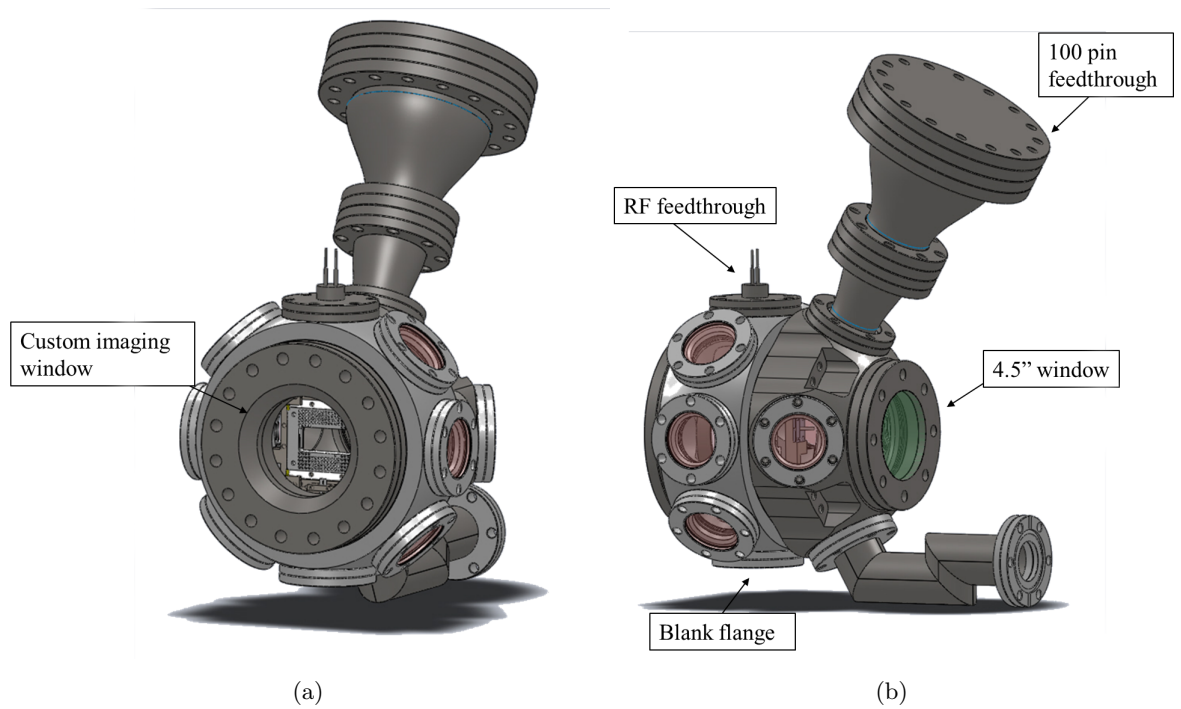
Drawings of the vacuum chamber with all the windows and feedthroughs attached, the assembly was made in SolidWorks.
